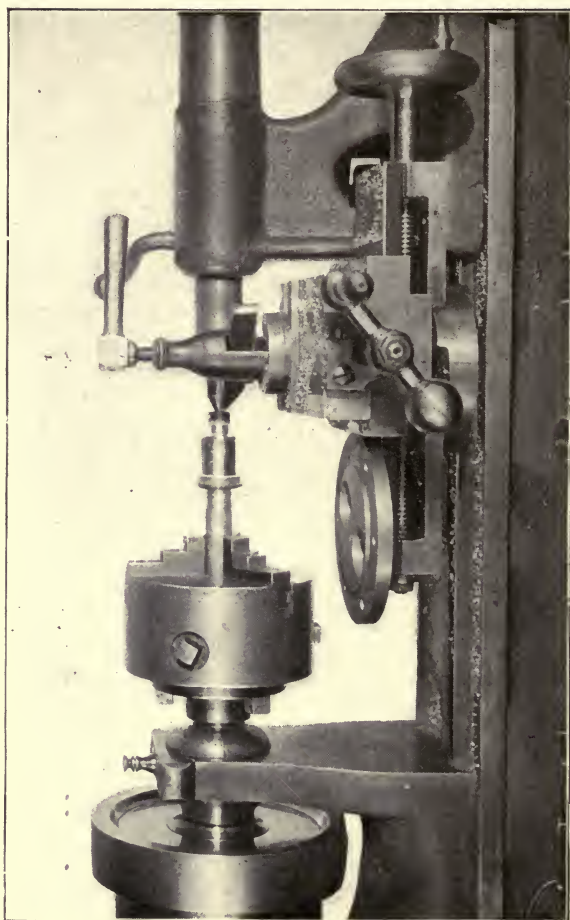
TURNING AND FINISHING INLET VALVE CASING ON A MANDREL.
